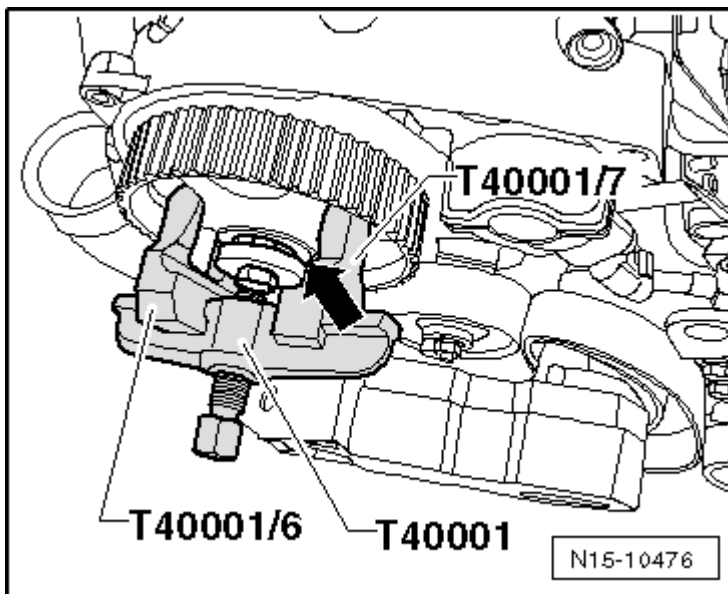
Identifying Tools To Pull Off Camshaft Sprocket
